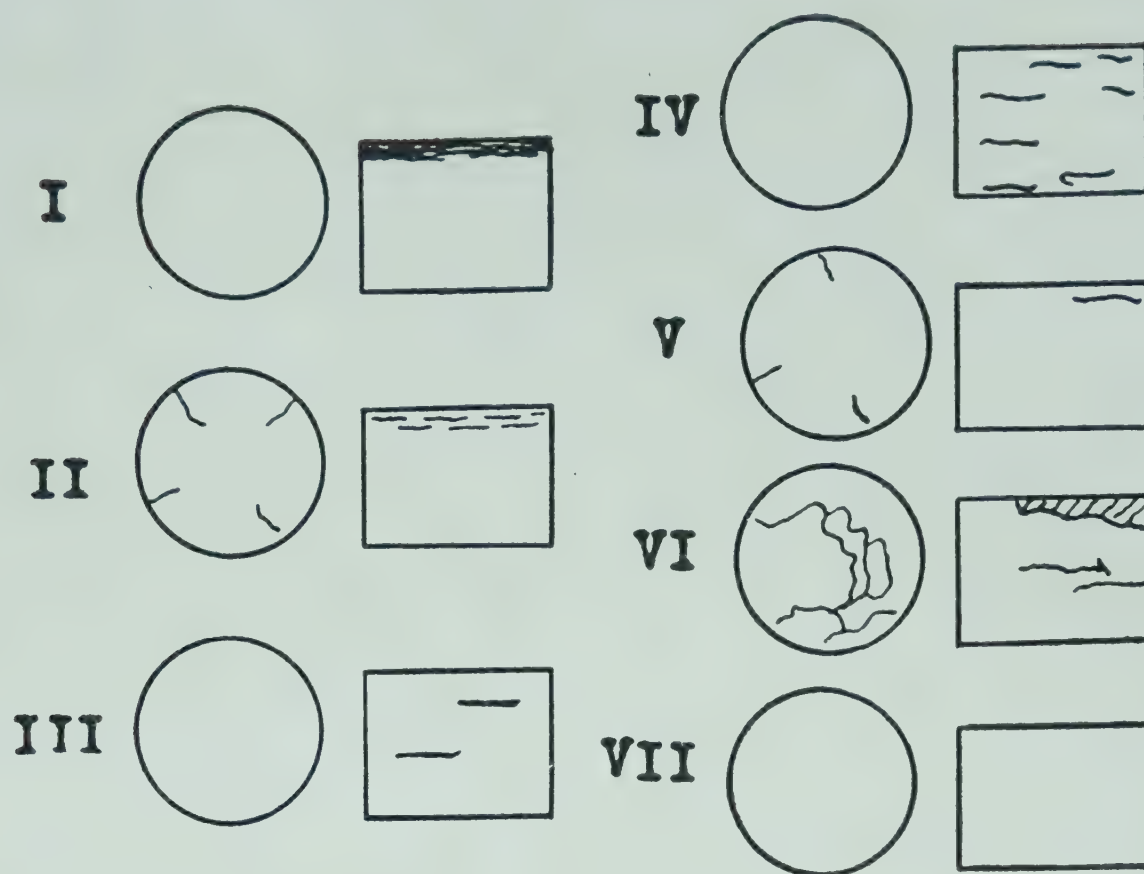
TYPES OF MOULDING DIE AND CRACKING STATES ON COAL BRIQUETTES
